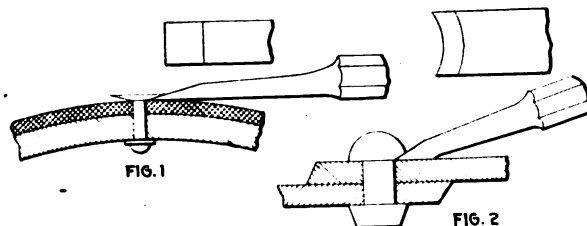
CHISEL GRIND FOR CUTTING OFF HEADS FROM COPPER RIVETS
